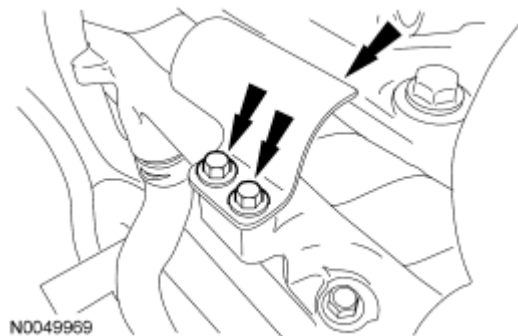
Locating Wiring Harness Retaining Bracket & Bolts
